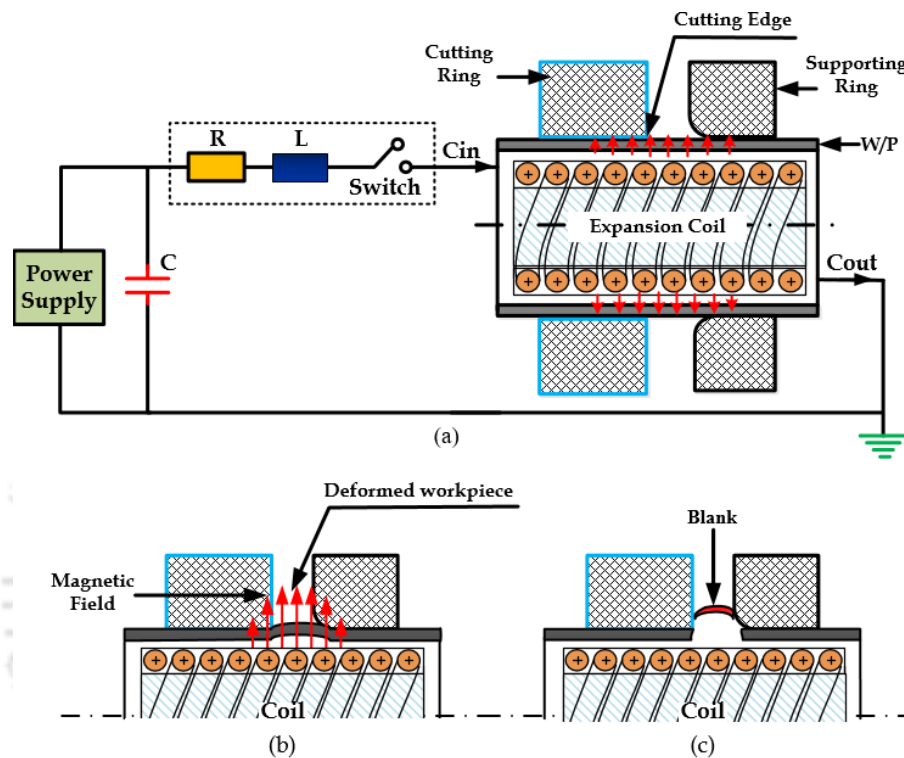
(a) Process setup of EM shearing, (b) Deformation in the workpiece and (c) Shearing of the workpiece
